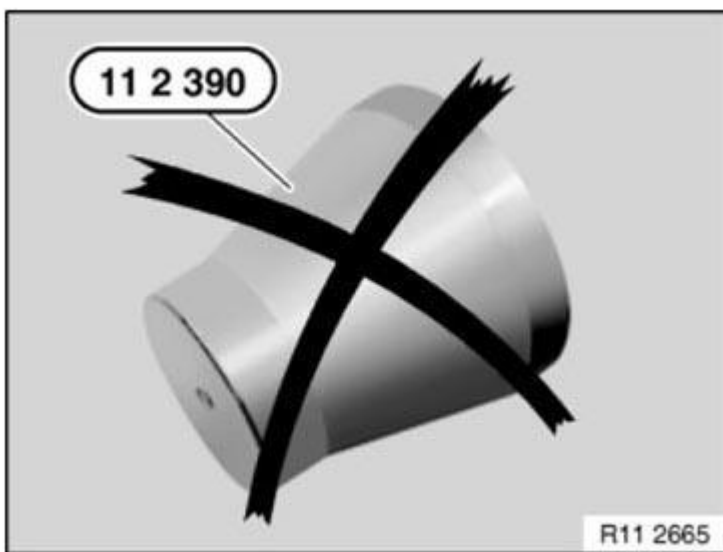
Precaution - Special Tool 11 2 390 Must Not Be Used
